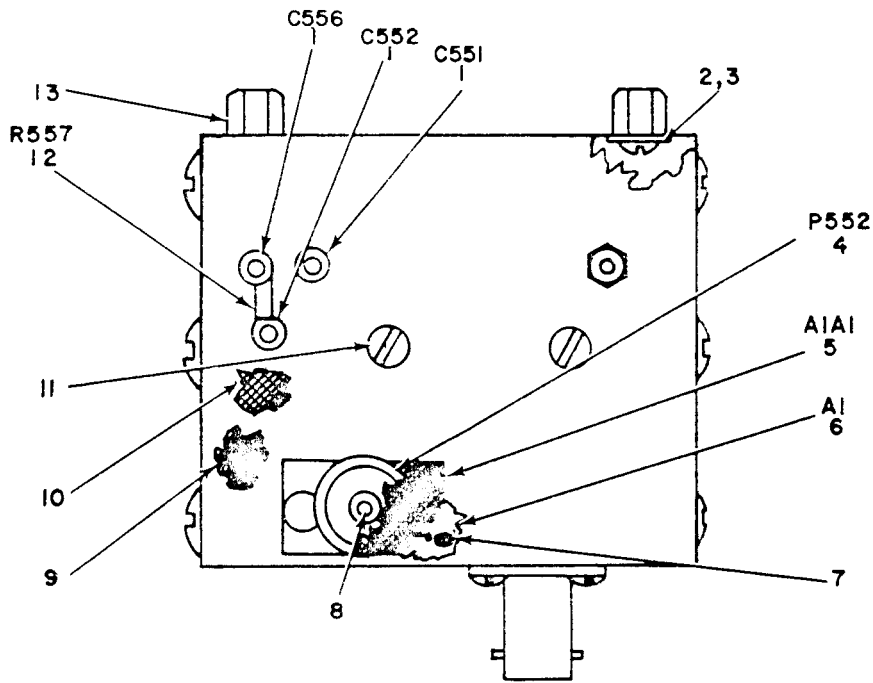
Circuit Board Assembly (A4A2A1) (Sheet 1 of 2).
